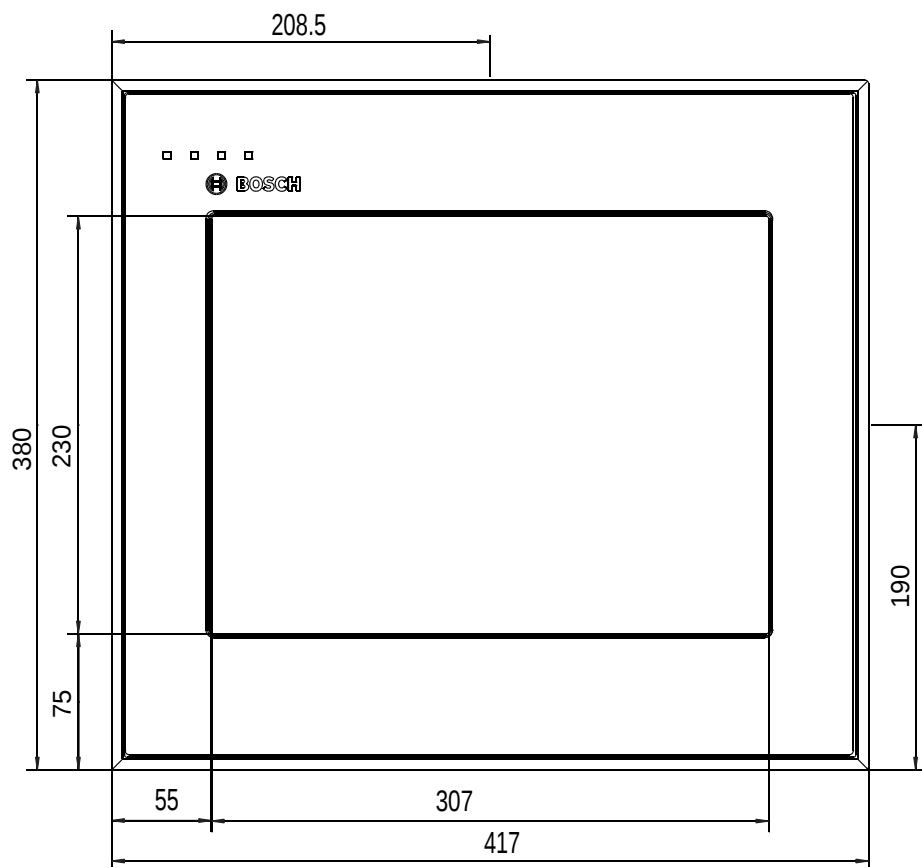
Dimensions: Front panel of the VDP 40.3AL devices
